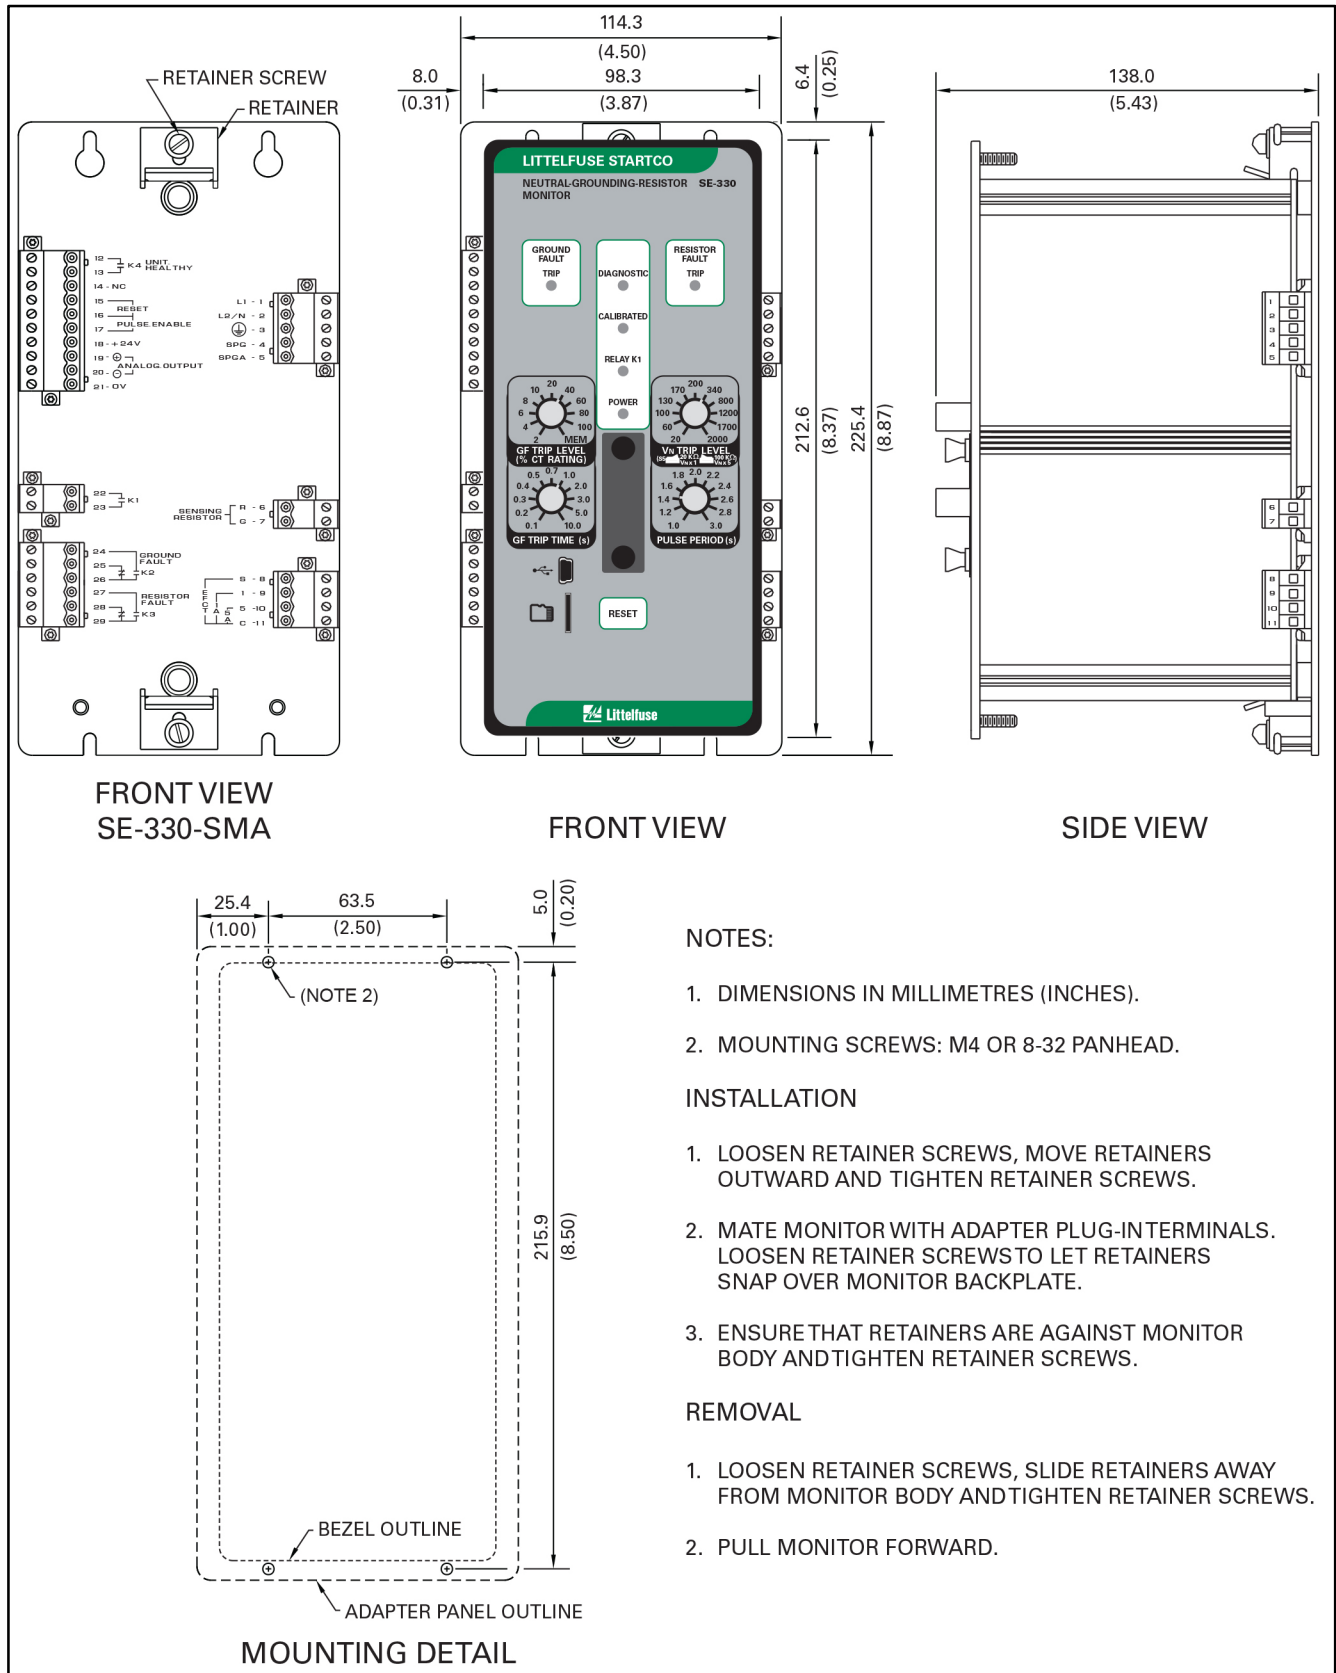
SE-330 Outline and Surface-Mounting Details.
